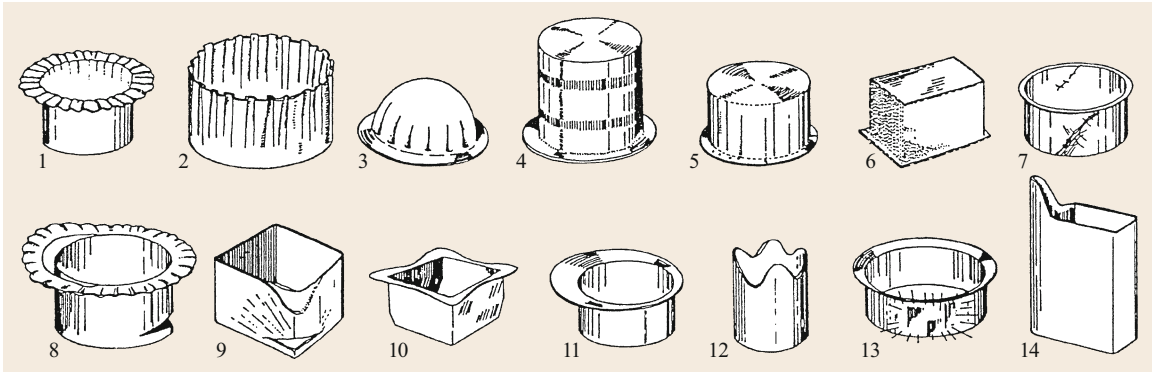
Various failure modes in deep-drawing: 1 – flange wrinkling; 2 – wall wrinkling; 3 – part wrinkling; 4 – ring prints; 5 – traces; 6 – orange skin; 7 – Lüders strips; 8 – bottom fracture; 9 – corner fracture; 10–12 – folding; 13, 14 – corner folding (after [11.15])
